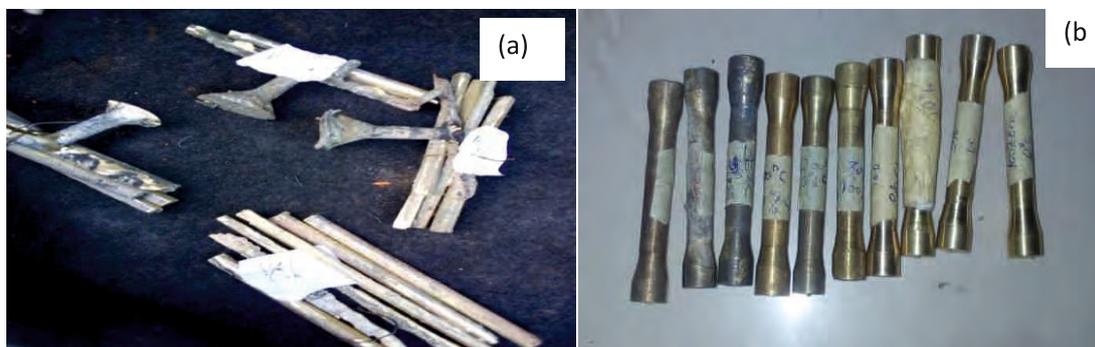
(a) Products of the casting process (b) Machined specimens for tensile strength test
